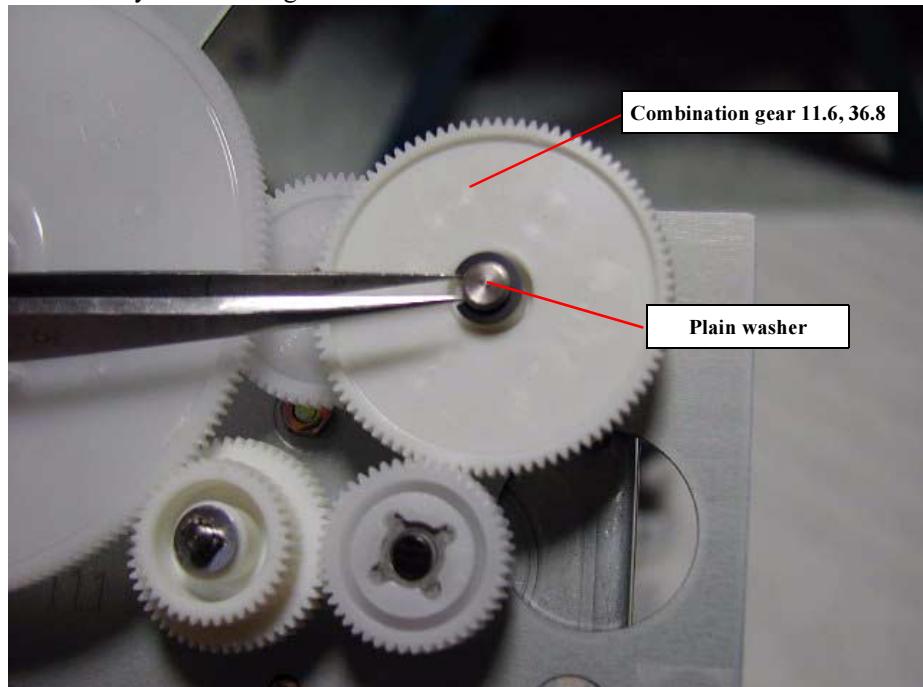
Removing the Plain washer and Combination gear 11.6, 36.8
